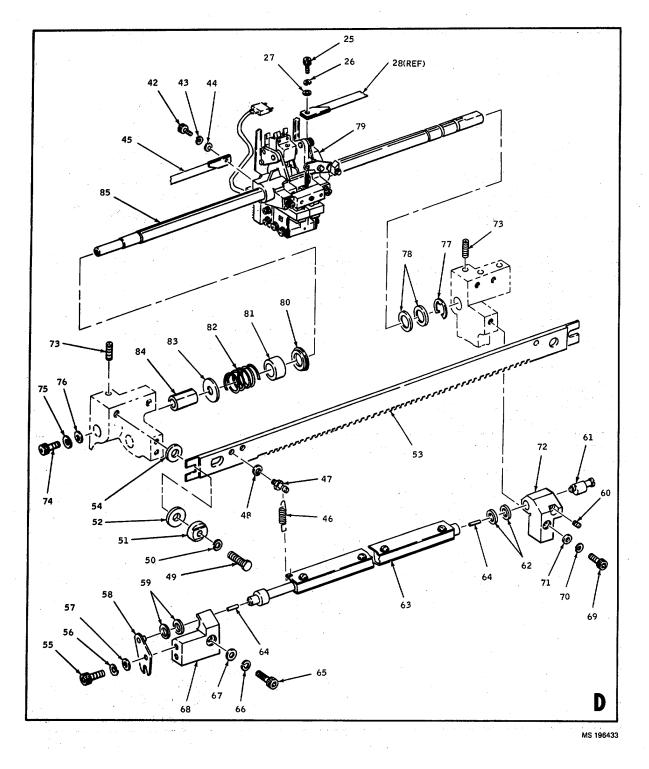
Printing Mechanism, Exploded View (Sheet 3 of 3)
